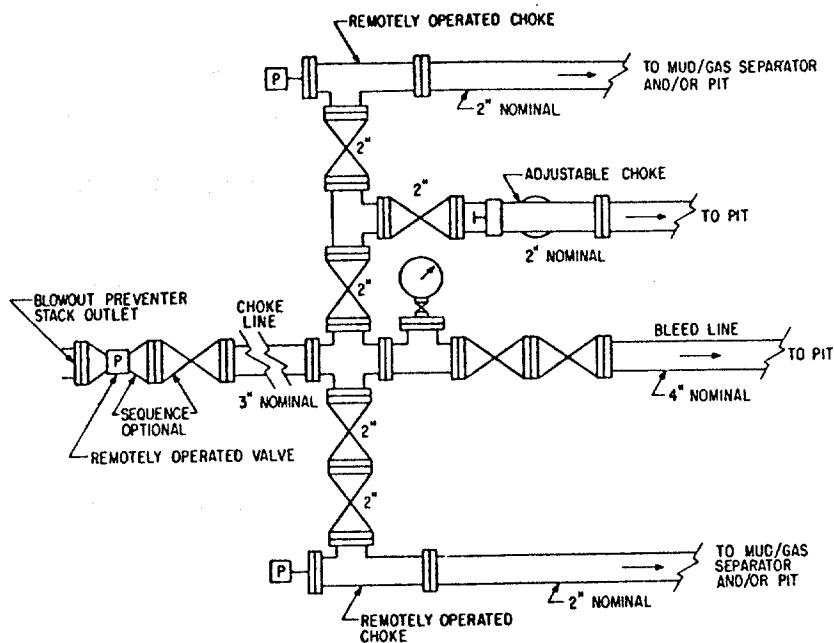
Typical choke manifold assembly for 10,000 and 15,000 psi rated working pressure service. Courtesy American Petroleum Institute, Ref. 4.1.
